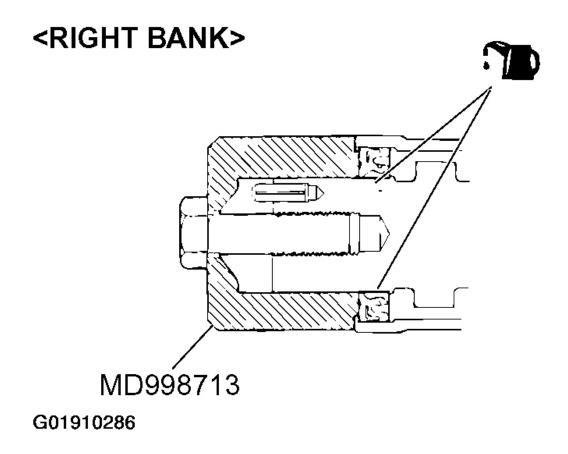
Installing Camshaft Oil Seal (Right Bank)
